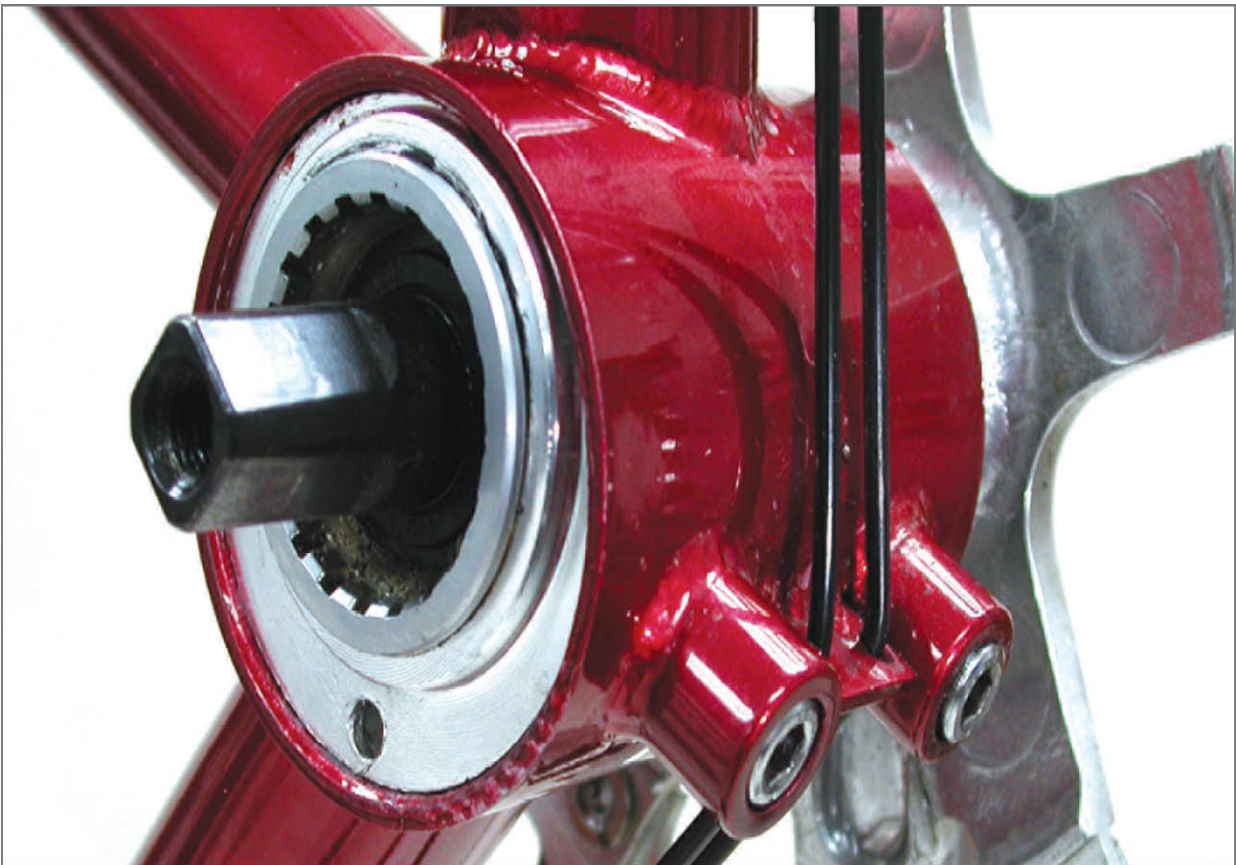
Eccentric bottom bracket shell with set screw binders
